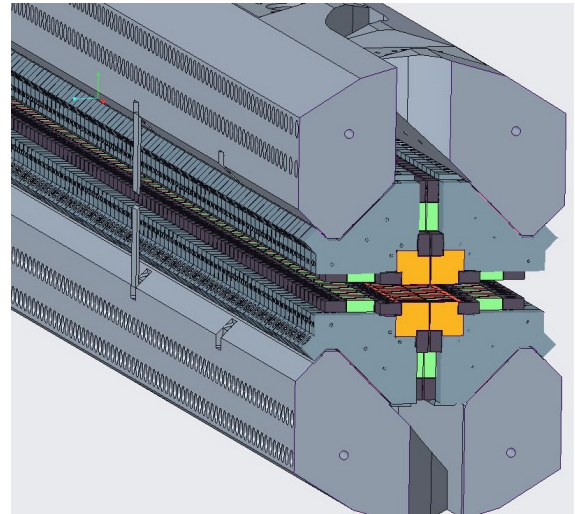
Technical drawing of the proposed IVUE32 magnet assembly. The functional magnets are shown in orange and will be covered by the shielding foil.
